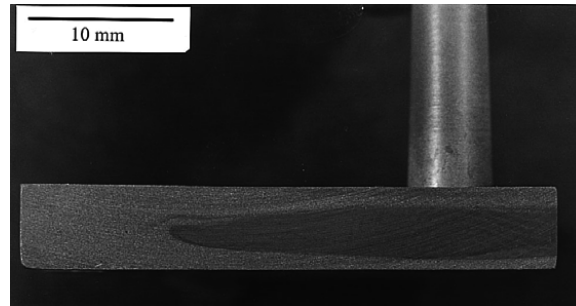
A green part which was produced by *sandwich-injection moulding* (core: carbonyl iron, outer skin: 316 L stainless steel and alumina) [51].
